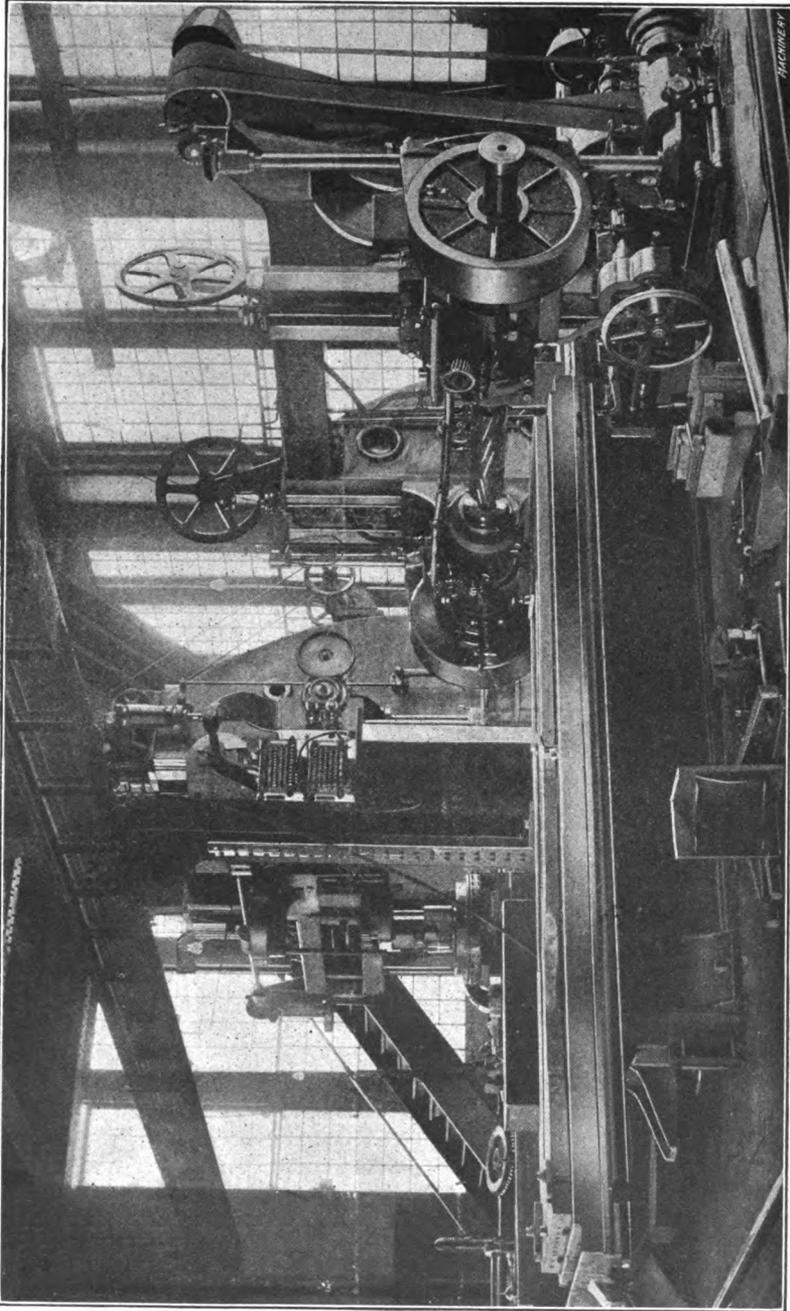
Horizontal Milling Machine on which Trailer Frames are Milled
